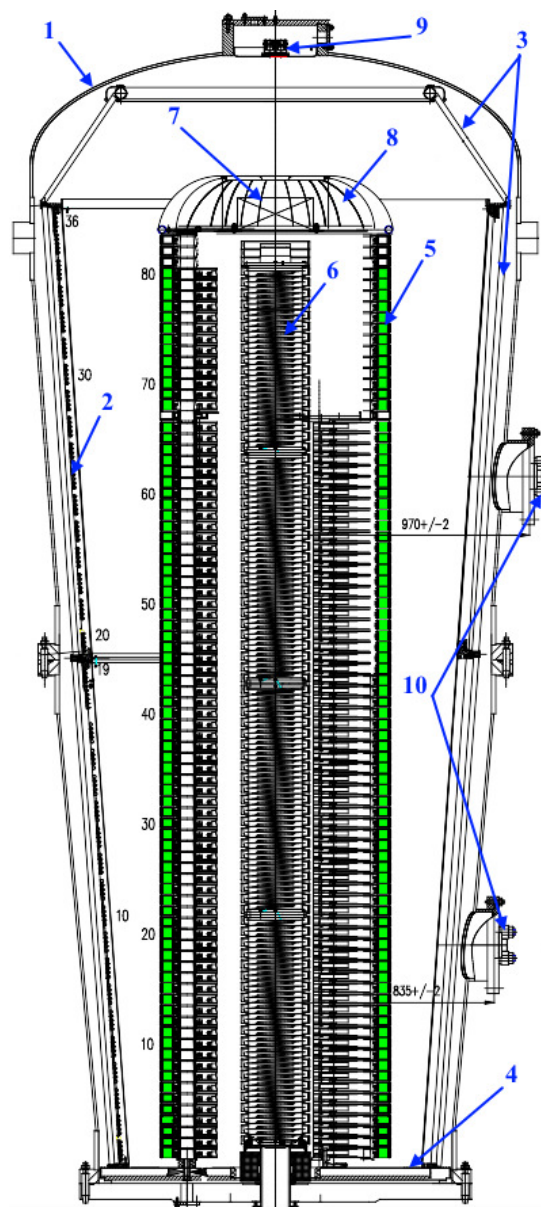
The ELV-15 view. 1 - vessel; 2 - primary windings; 3,4 - magnetic guides; 5 - rectifier sections; 6 - accelerating tube; 7 - injector control unit; 8 - high voltage electrode; 9 - optical channels for injector control; 10 - primary winding feedthrough.
